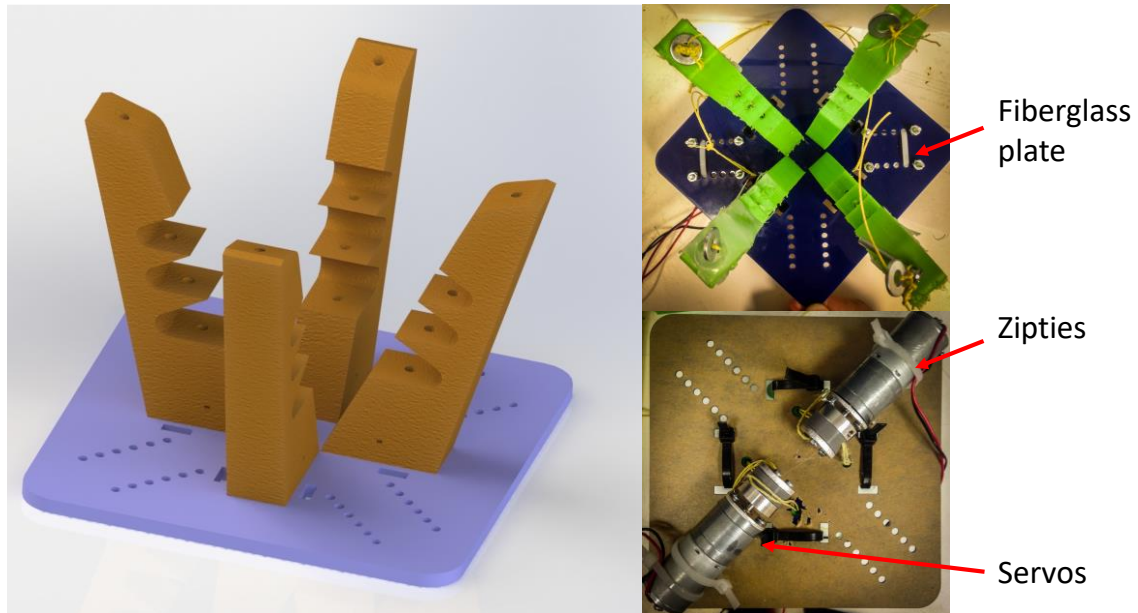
(Left) Assembly CAD demonstrating orientation and placement of finger on the board. The zip-ties, motors, and motor-mounts are omitted from the CAD. (Right-Top) Top view of assembled gripper. (Right-Bottom) Bottom view of assembled gripper
